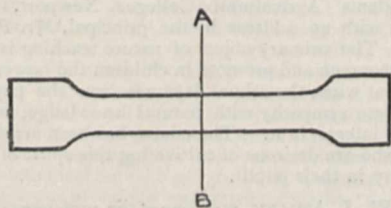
Test piece of wrought iron welded at A B. See Fig. 6 for micro-section.
